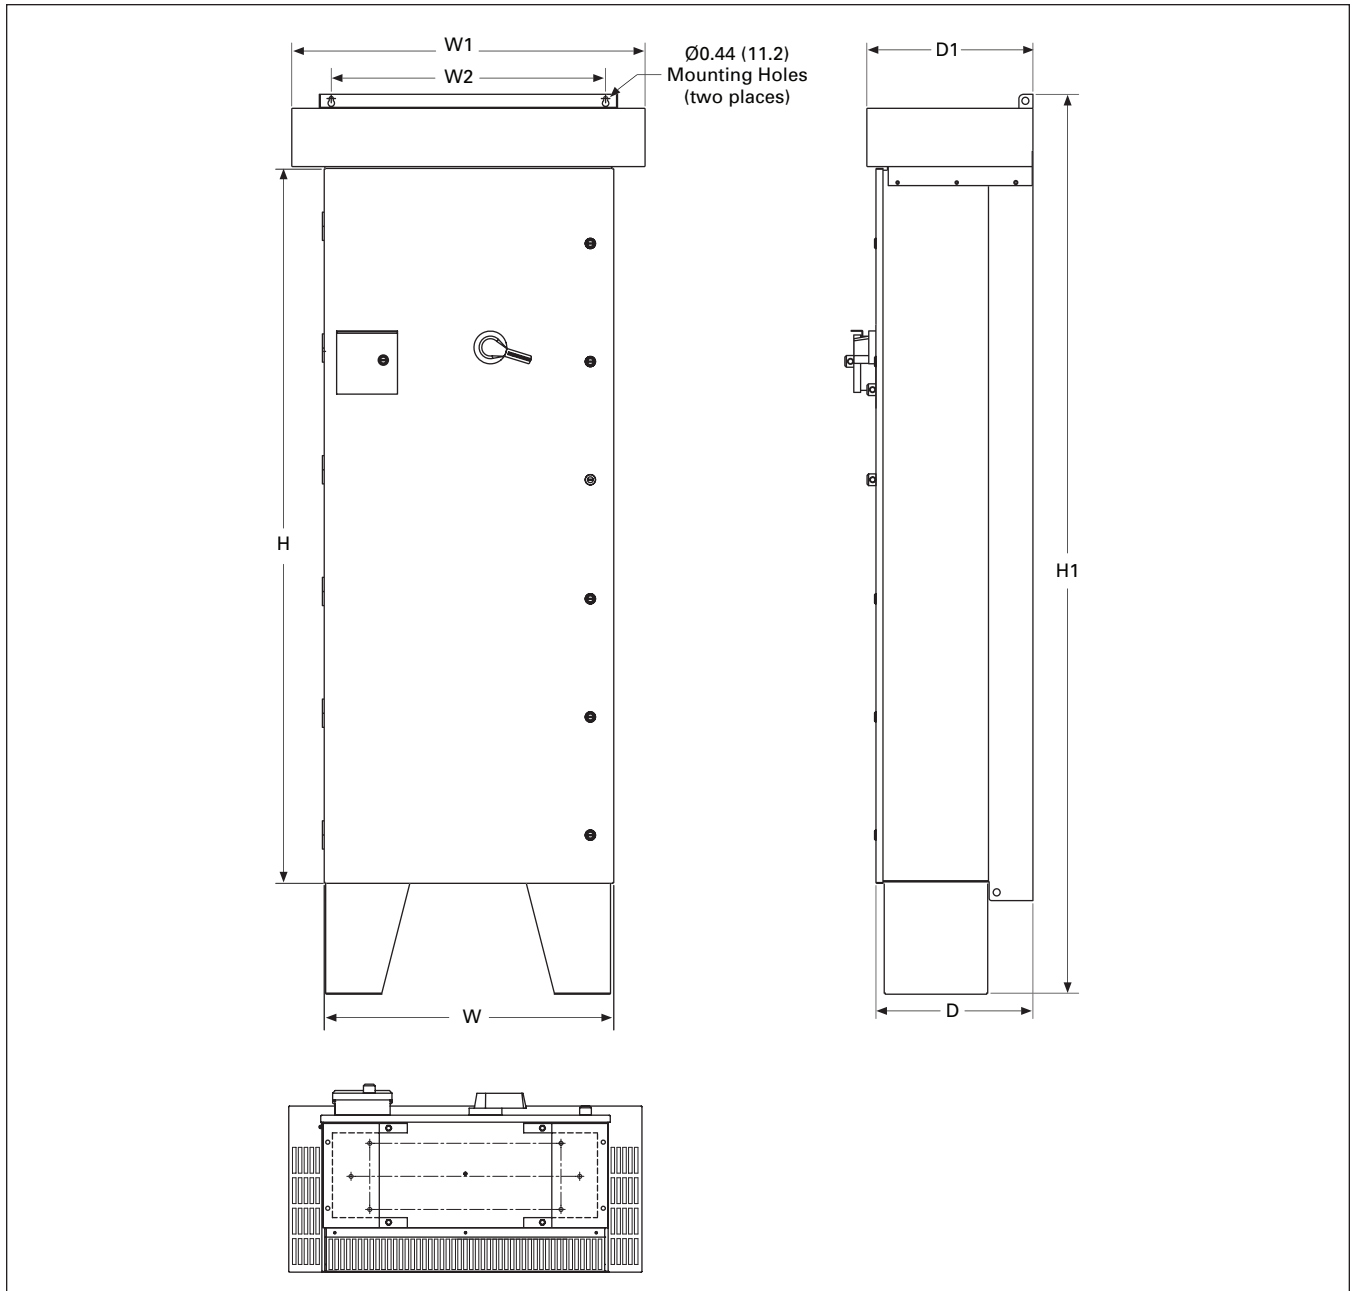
Enclosure Size D—UL Type 3R—Approximate Dimensions in Inches (mm)
